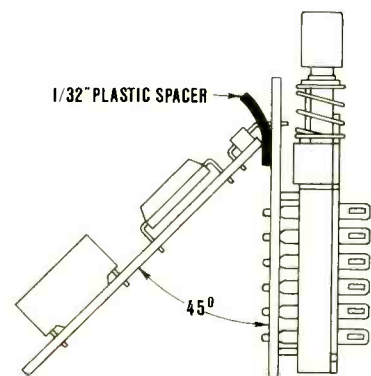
HOW THE PC BOARDS ARE ALIGNED prior to mounting in the custom *Digi-Toll* cabinet.
